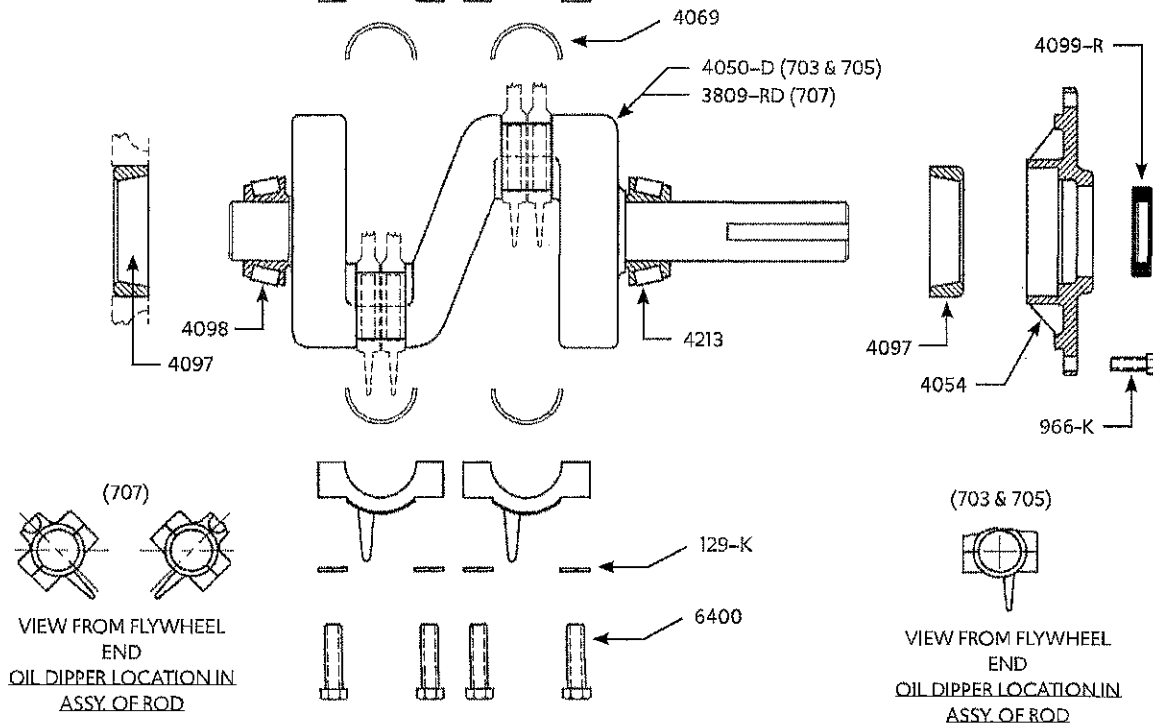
PISTON AND CRANKSHAFT ASSEMBLY PARTS LISTS
